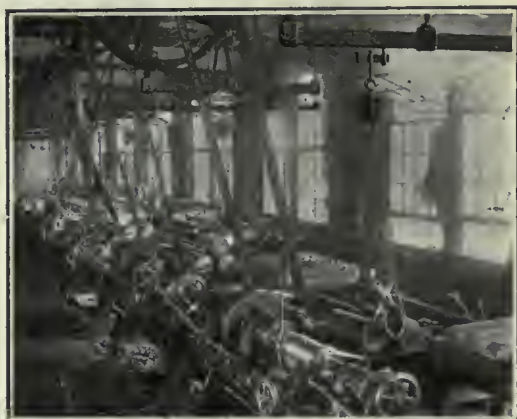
DETAIL VIEW OF CHAIN BLOCKS AND CARRIERS.
